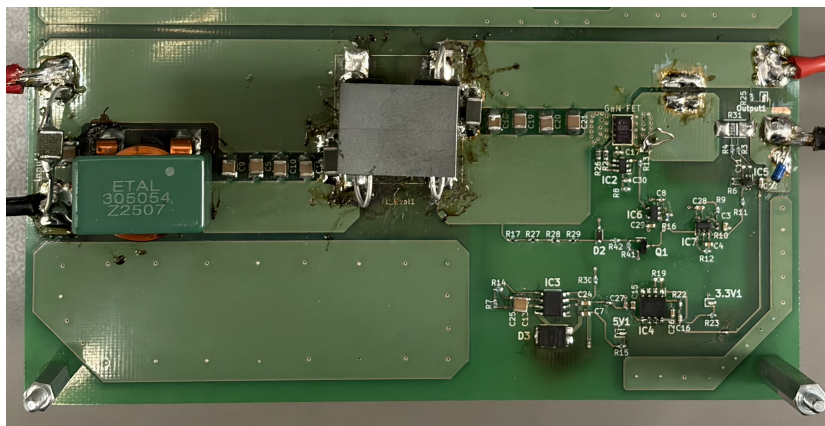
Assembled PCB prototype configured with a single GaN FET.
